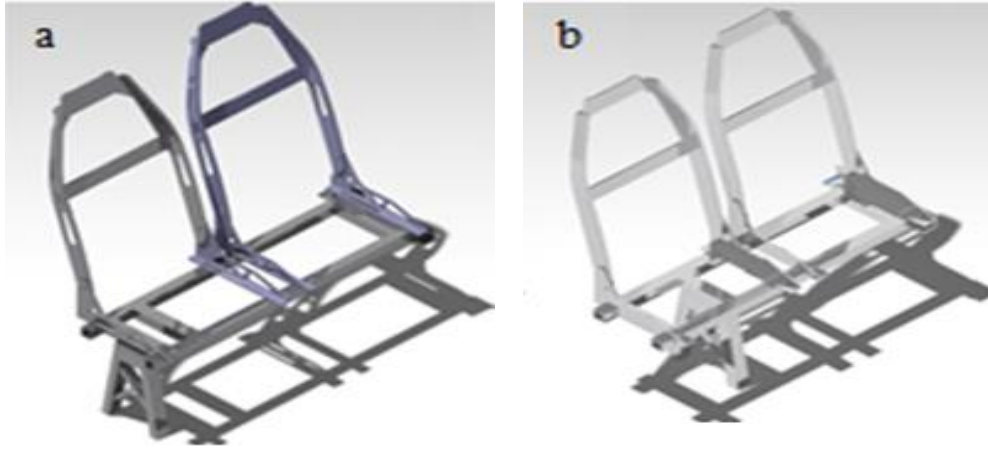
Seat designs a) Reference seat design b) Aluminum alloy seat design
